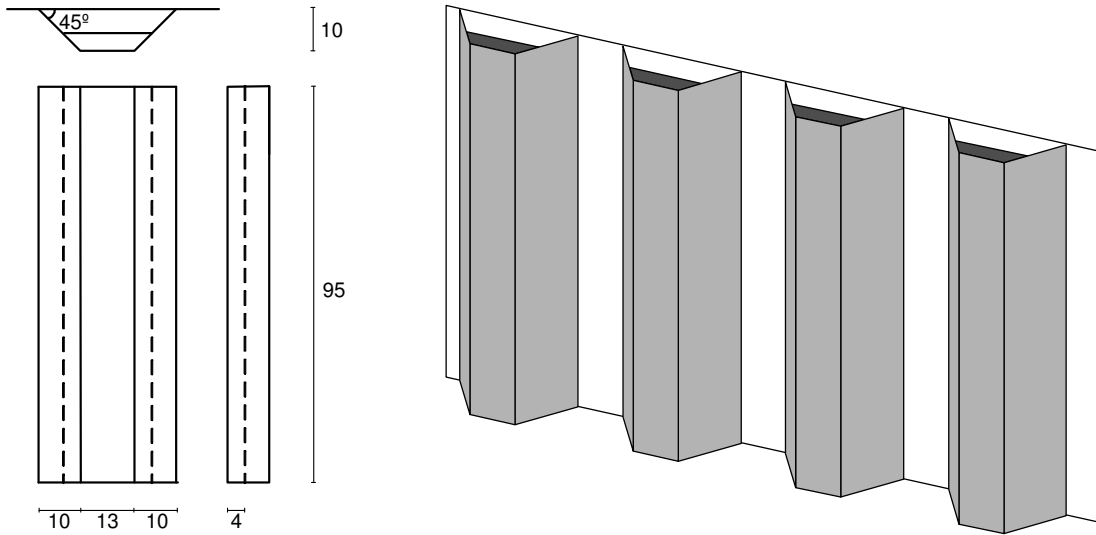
Wall ribs (units in cm) fixed at the outer vertical wall of the flume
